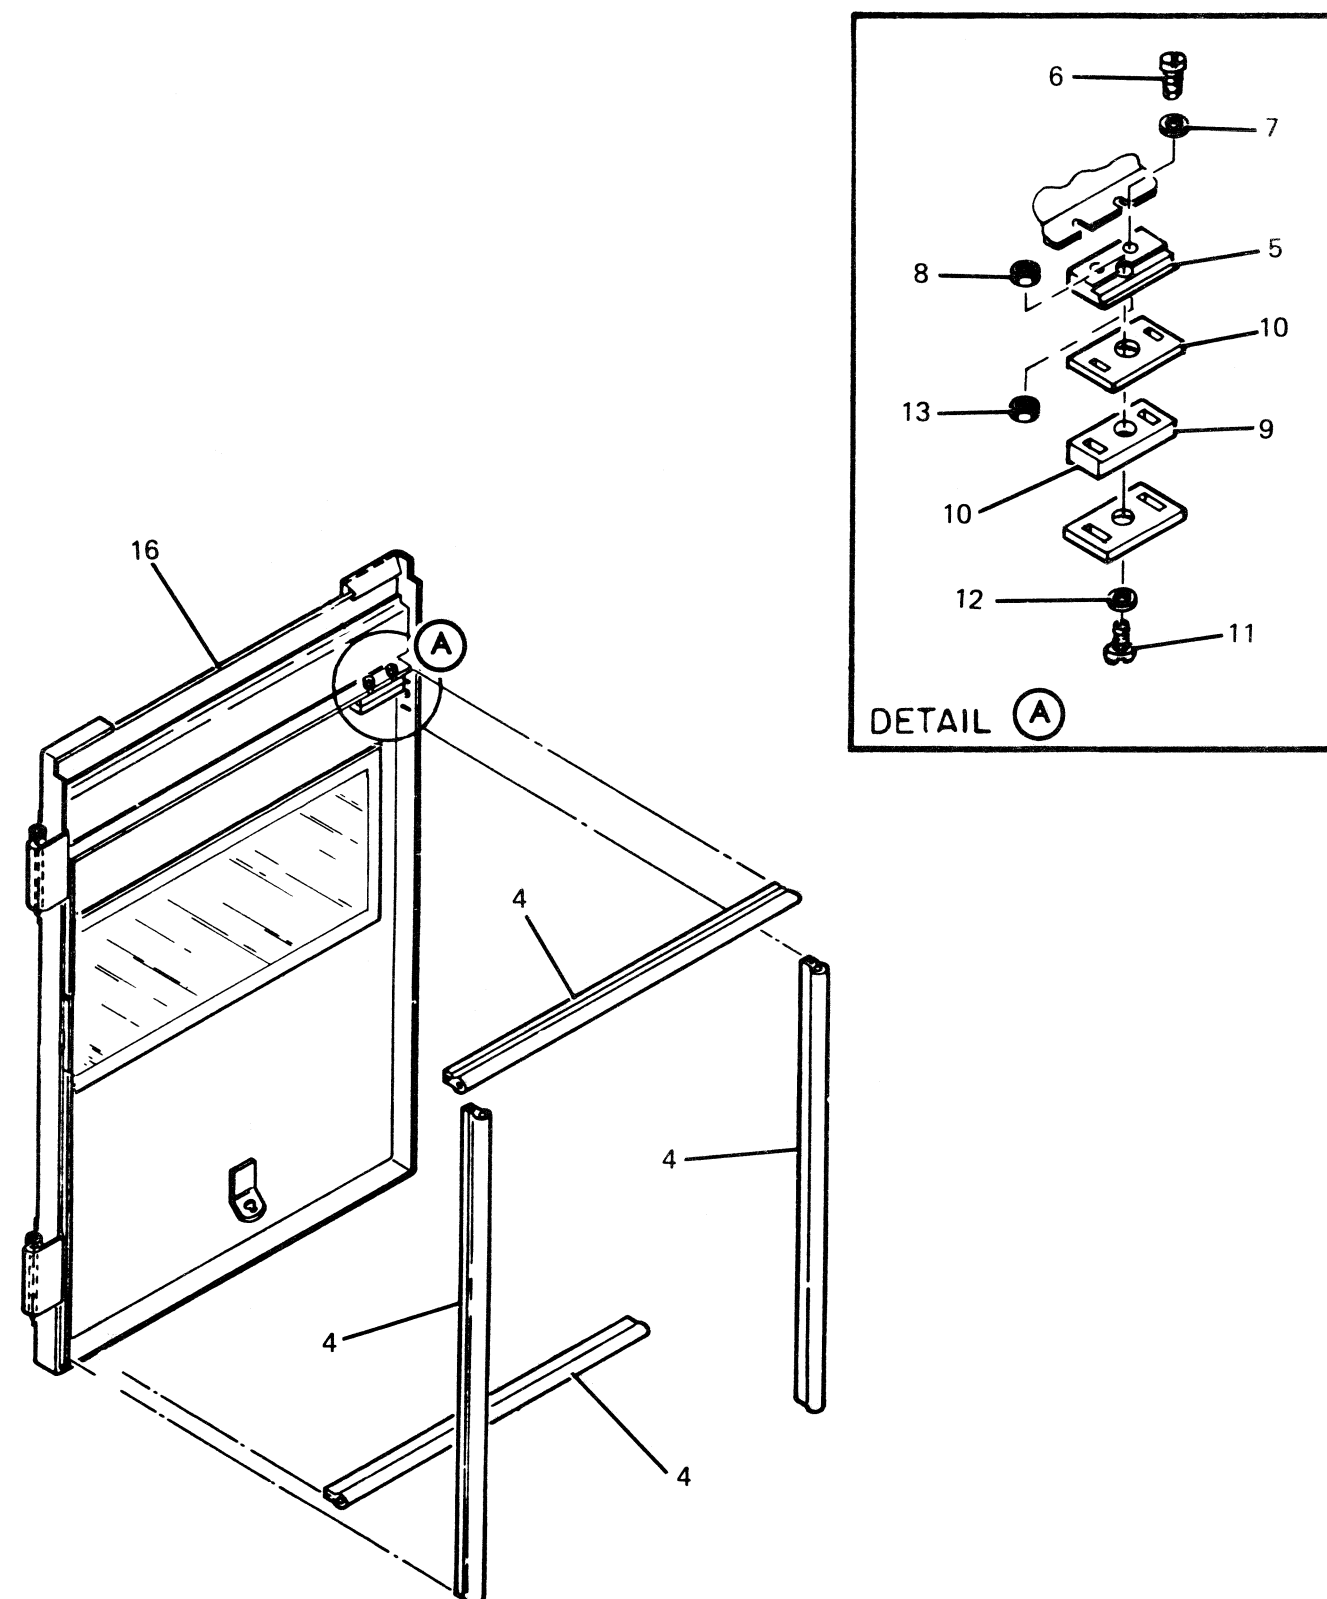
FRONT DOOR ASSEMBLY. SEE LIST 15.
